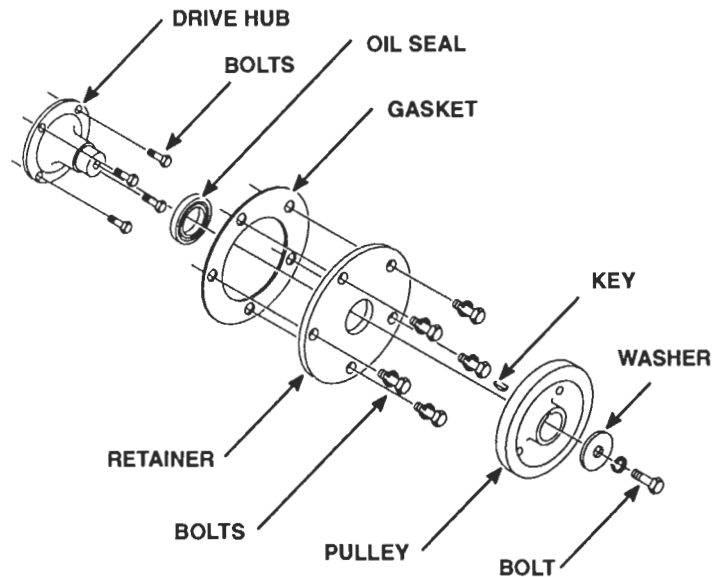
Accessory Drive Components for Belt Driven Accessory (Drive Hub Type)
